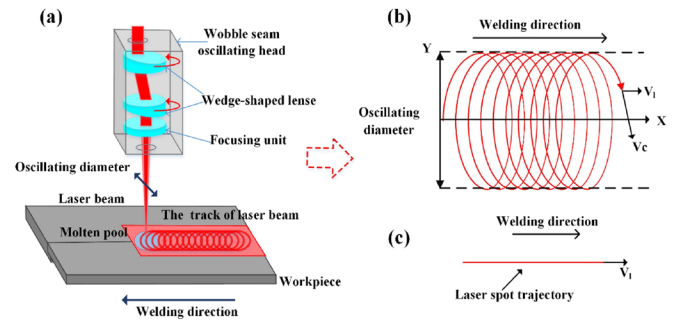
(a) Oscillating head; (b) welding path; (c) welding direction [13].
